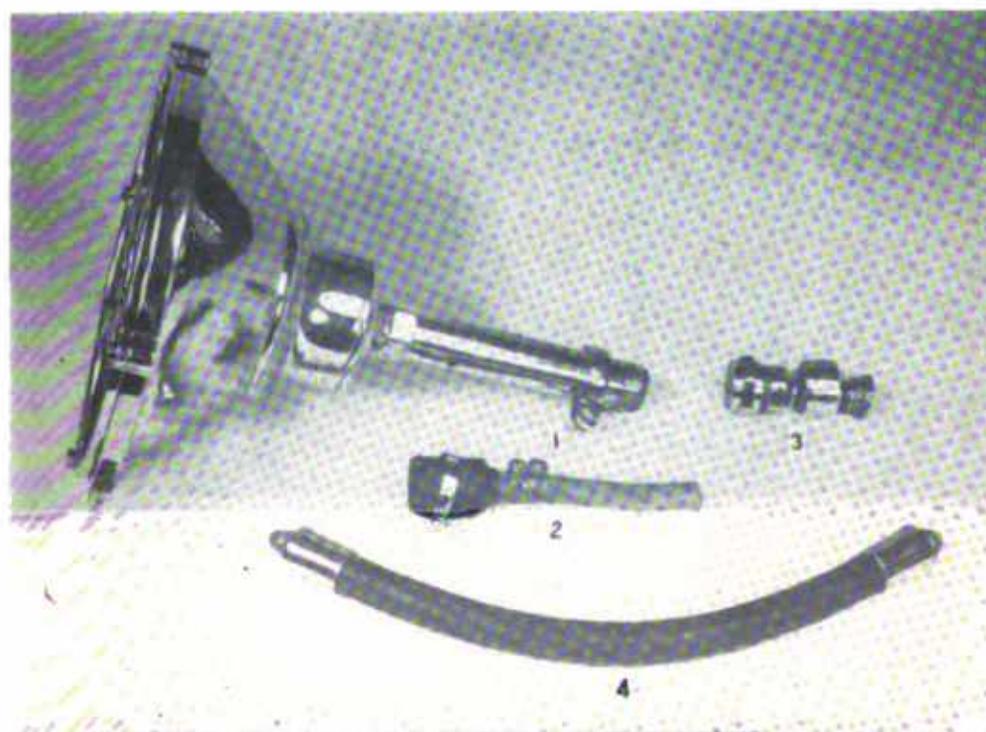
Diving light, A. J. Morse & Co. type—Disassembled.
